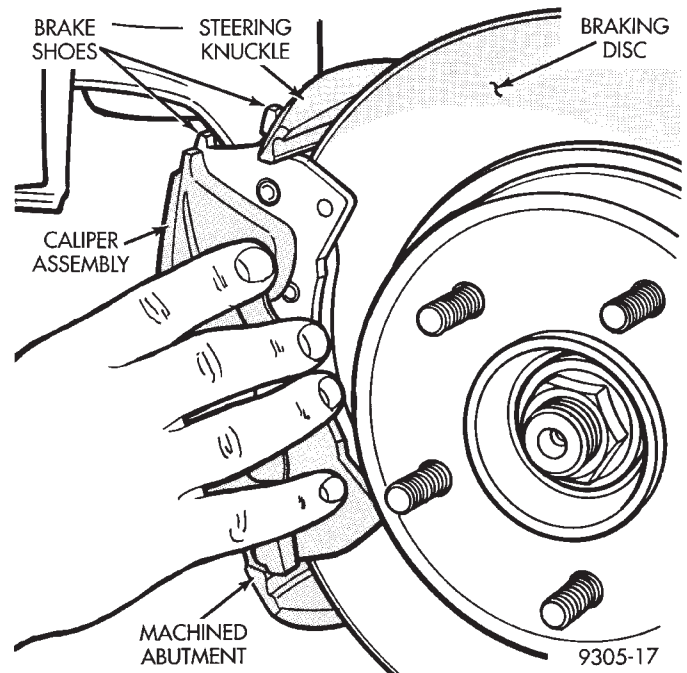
Removing Caliper Assembly From Steering Knuckle And Rotor
